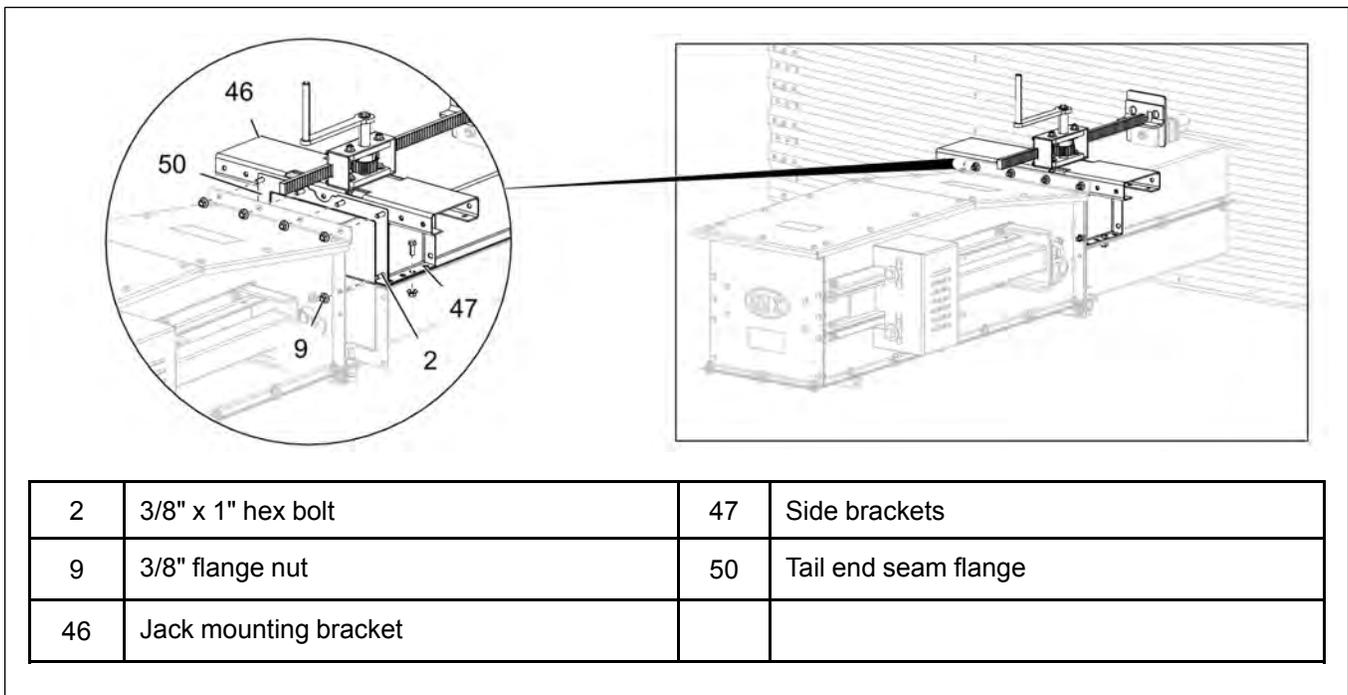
Mounting the jack assembly to the jack mounting and side brackets
